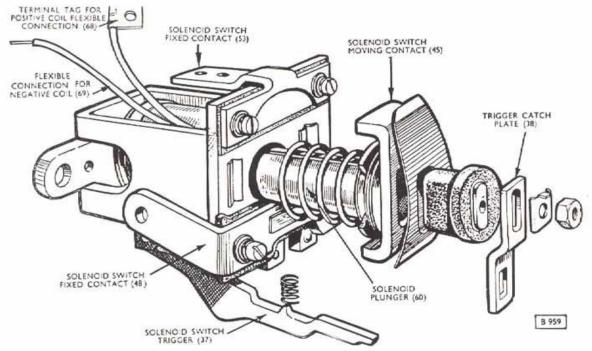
Exploded view of starter motor solenoid switch (C.A.Y.)
